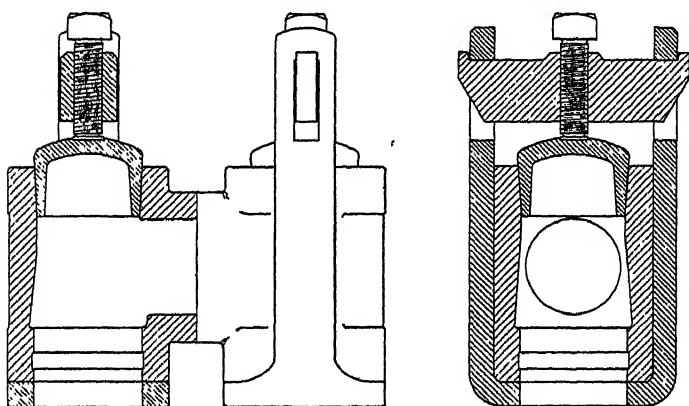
JOINT BETWEEN A TUBE AND A RETURN HEADER WITH A TAPERED CUP PLUG
